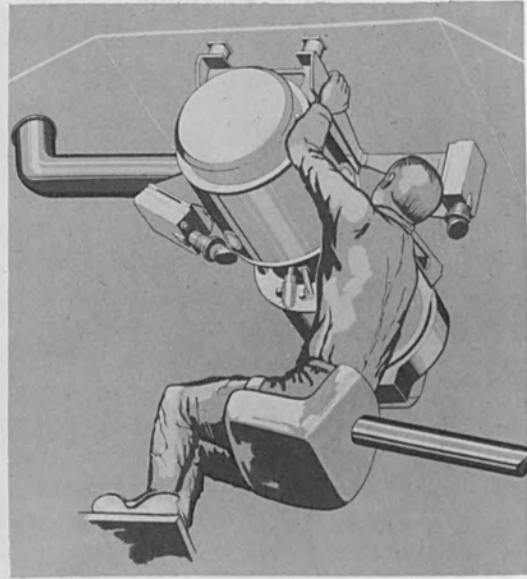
Artist's illustration of an astronaut performing a welding experiment.
